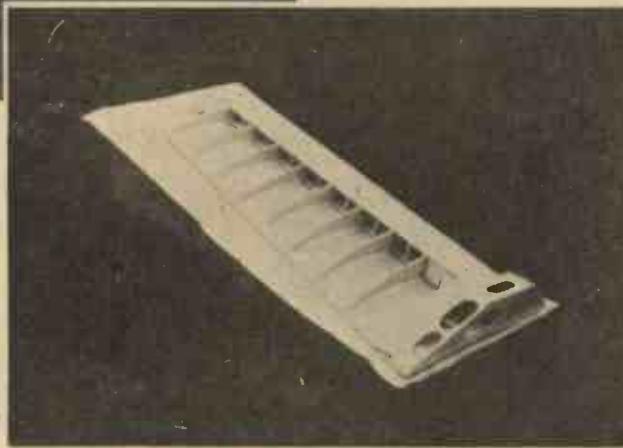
The right wing upon its bed on which it is constructed. Note centre section.
